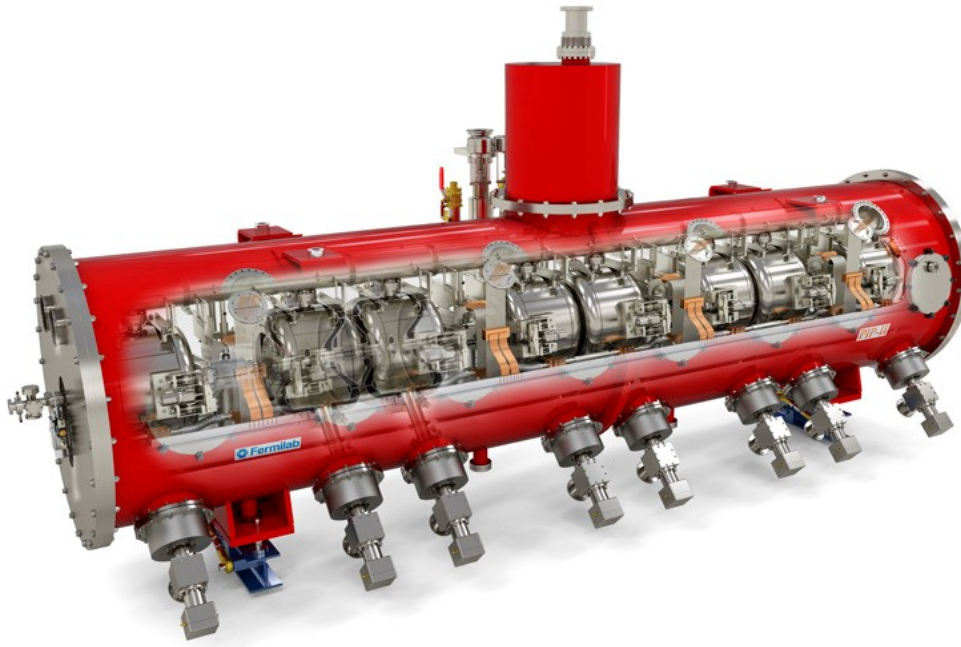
Cut-away view of SSR1 cryomodule designed for PIP-II.
